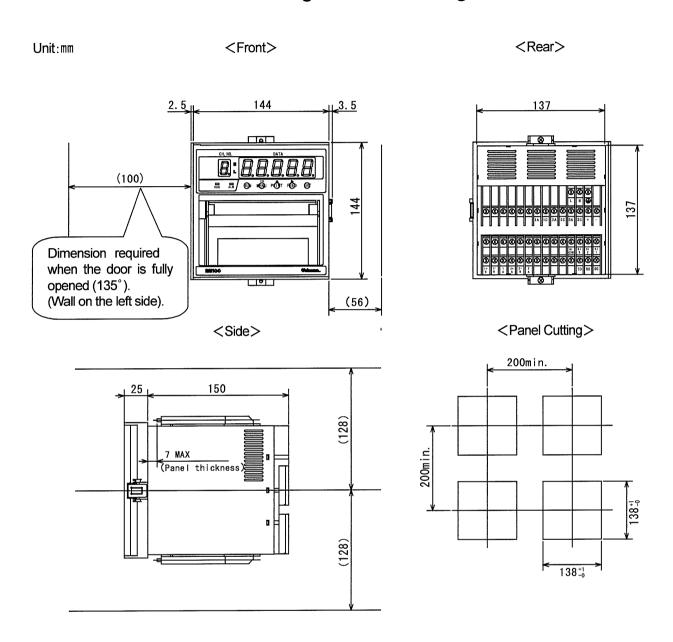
Outside Dimensions and Panel Cutting Dimensions
